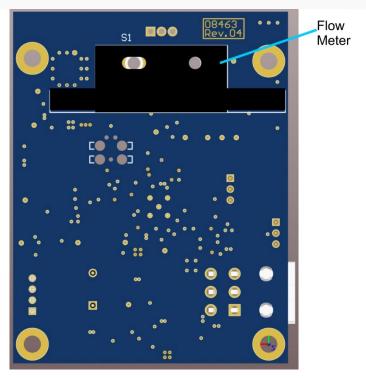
DC Pump Flow Meter (DC Pump Control Board Bottom)
